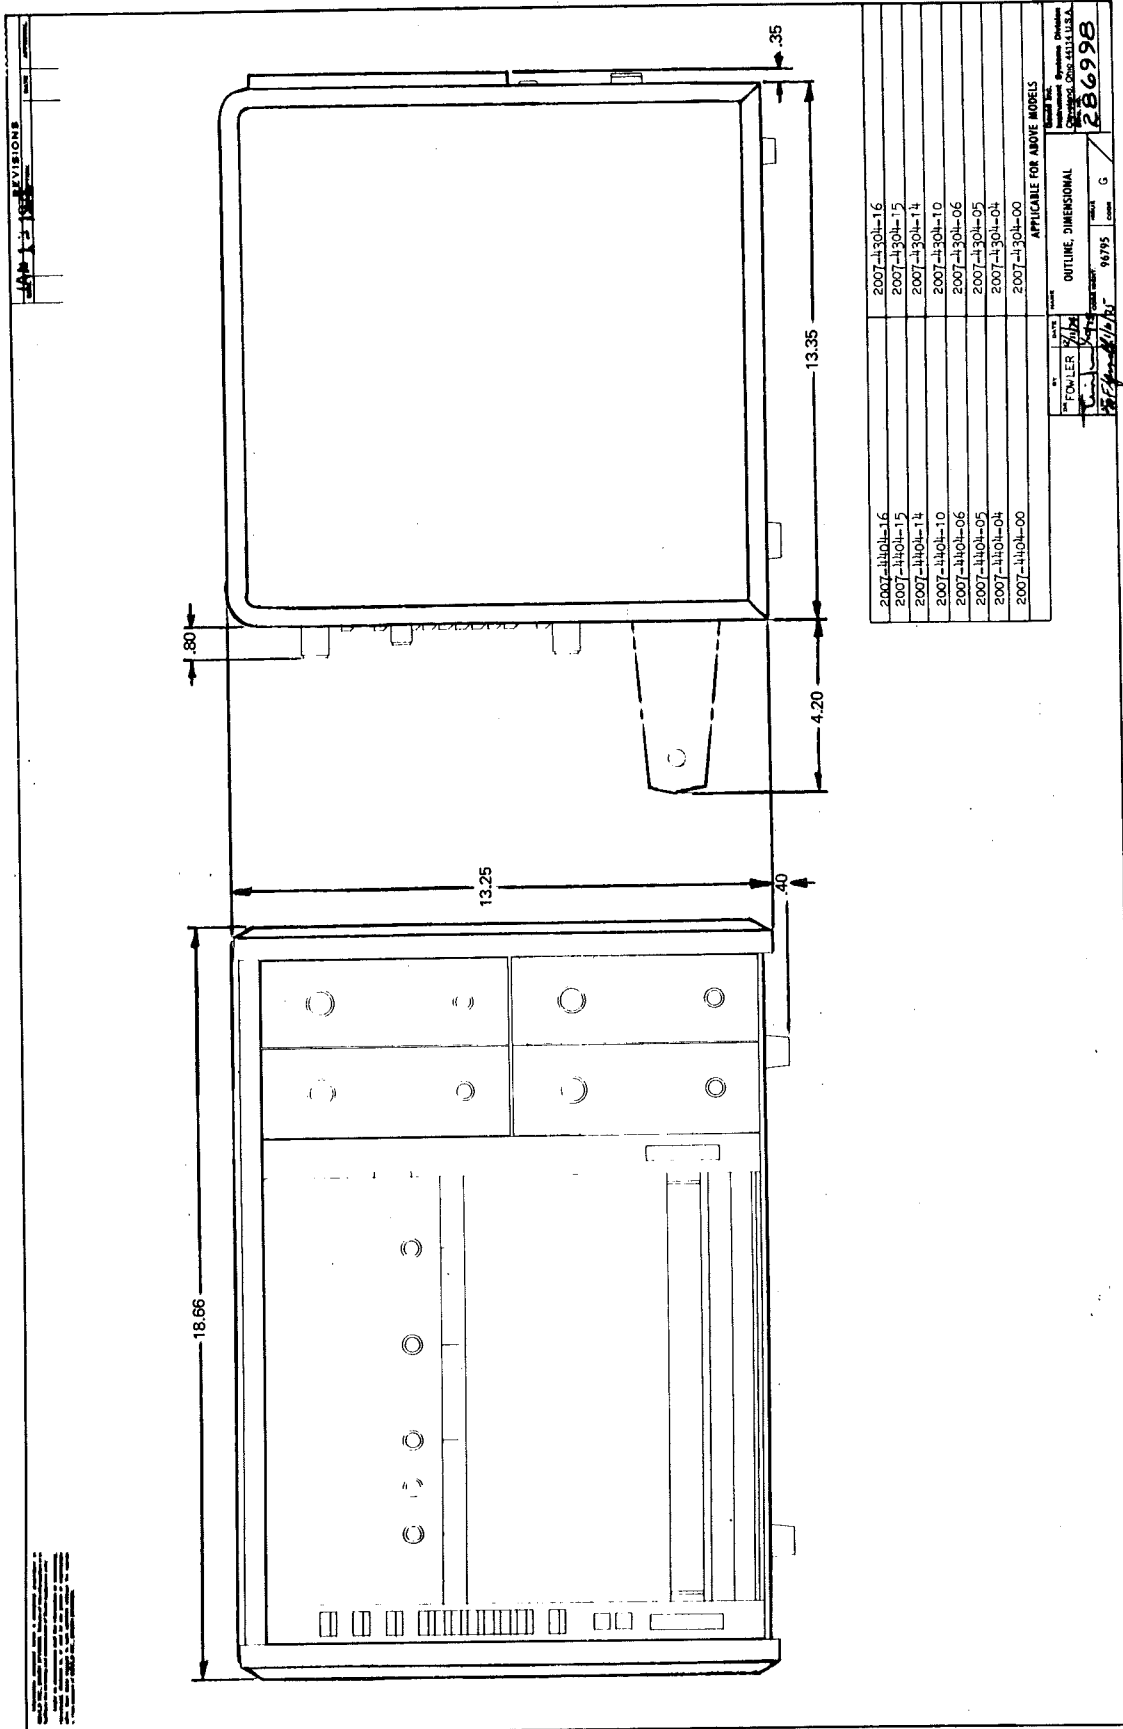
OUTLINE DIMENSIONS - 2400 SERIES WITH 3 or 4 PREAMPS
